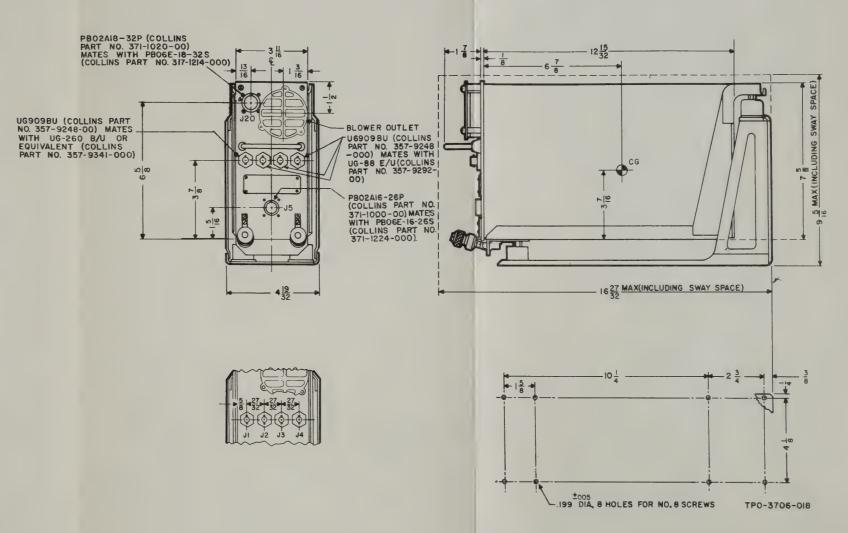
309A-2E Antenna Coupler Control, Outline and Mounting Dimensions.
